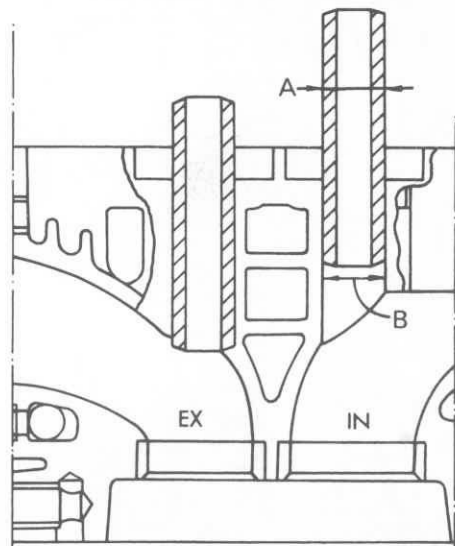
11 Standard tolerances for valve guides and guide bores in head, indicating the desired interference fit
